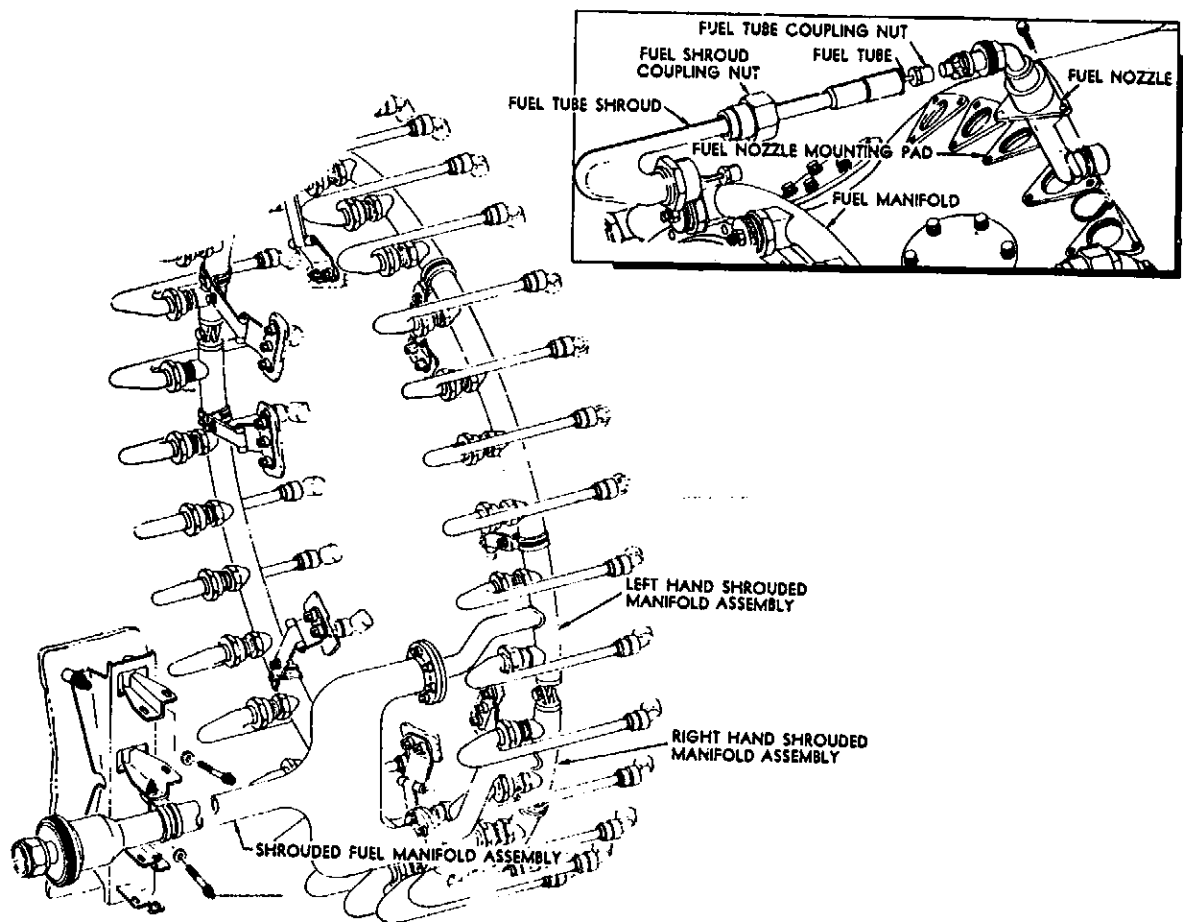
CF6-50 Engine Fuel Manifold Assembly.
